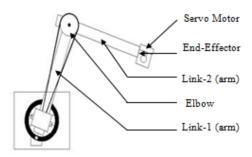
Position of Components 2-DOF Robot Manipulator Top View
